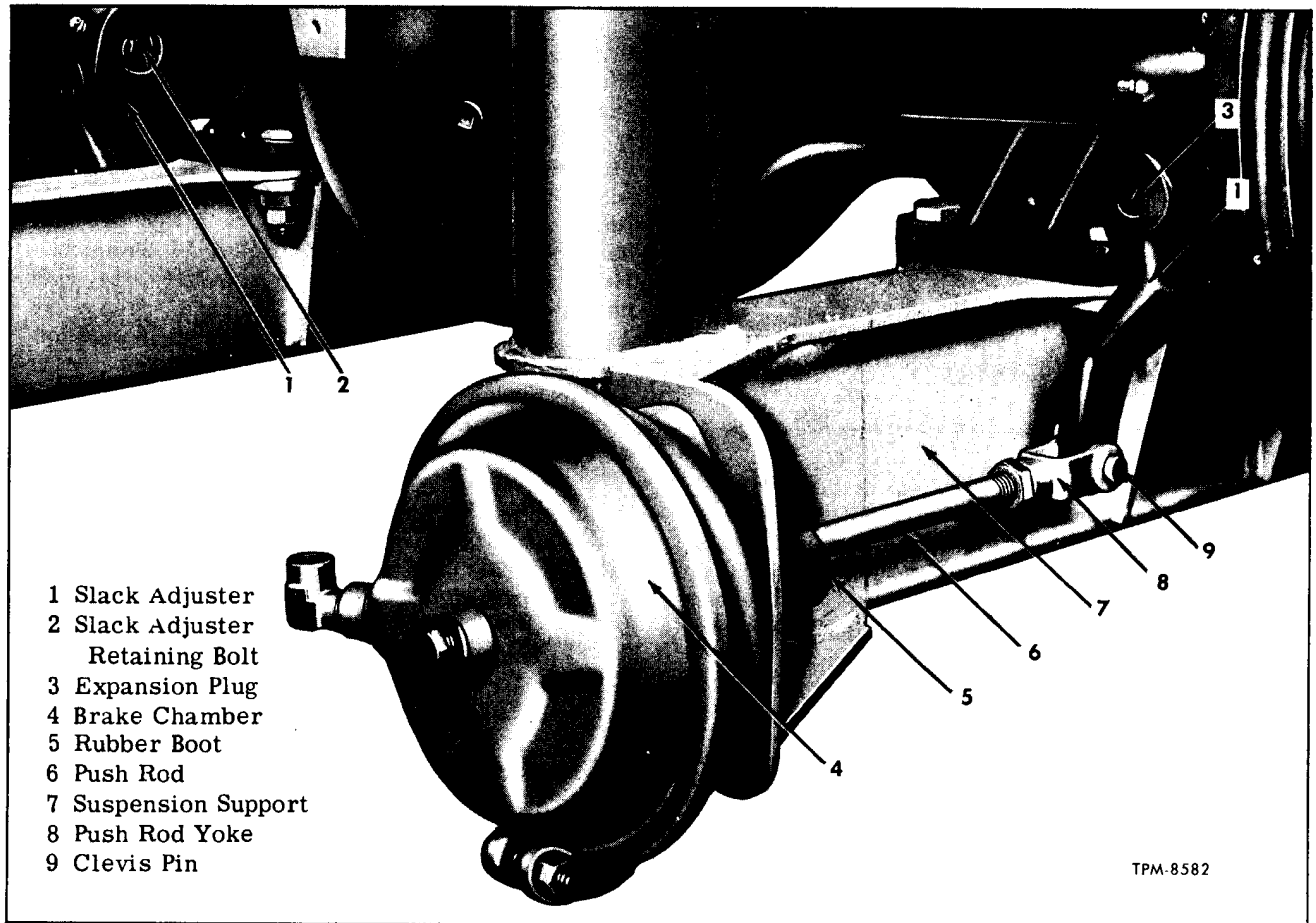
Rear Brake Chamber and Slack Adjuster Mounting
